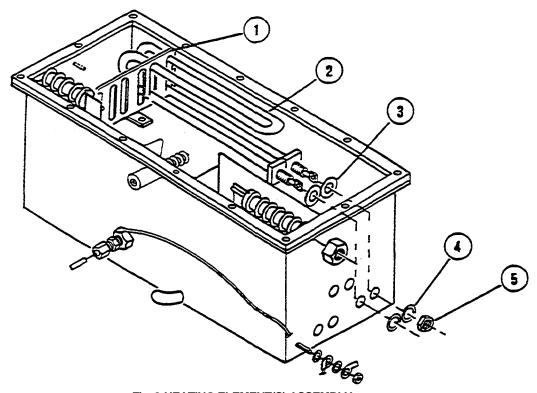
HEATING ELEMENT(S) ASSEMBLY
